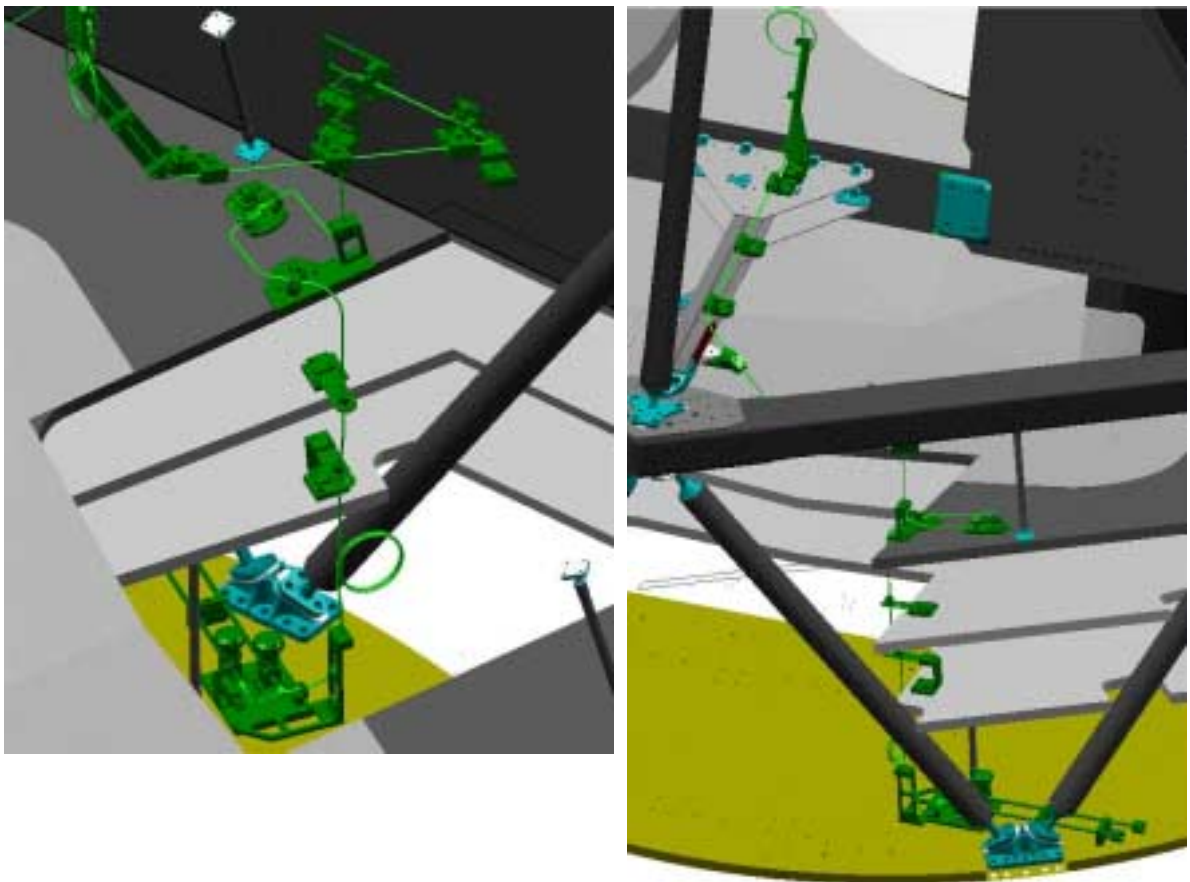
4K Cooler pipes mounted on Grooves and Telescope
